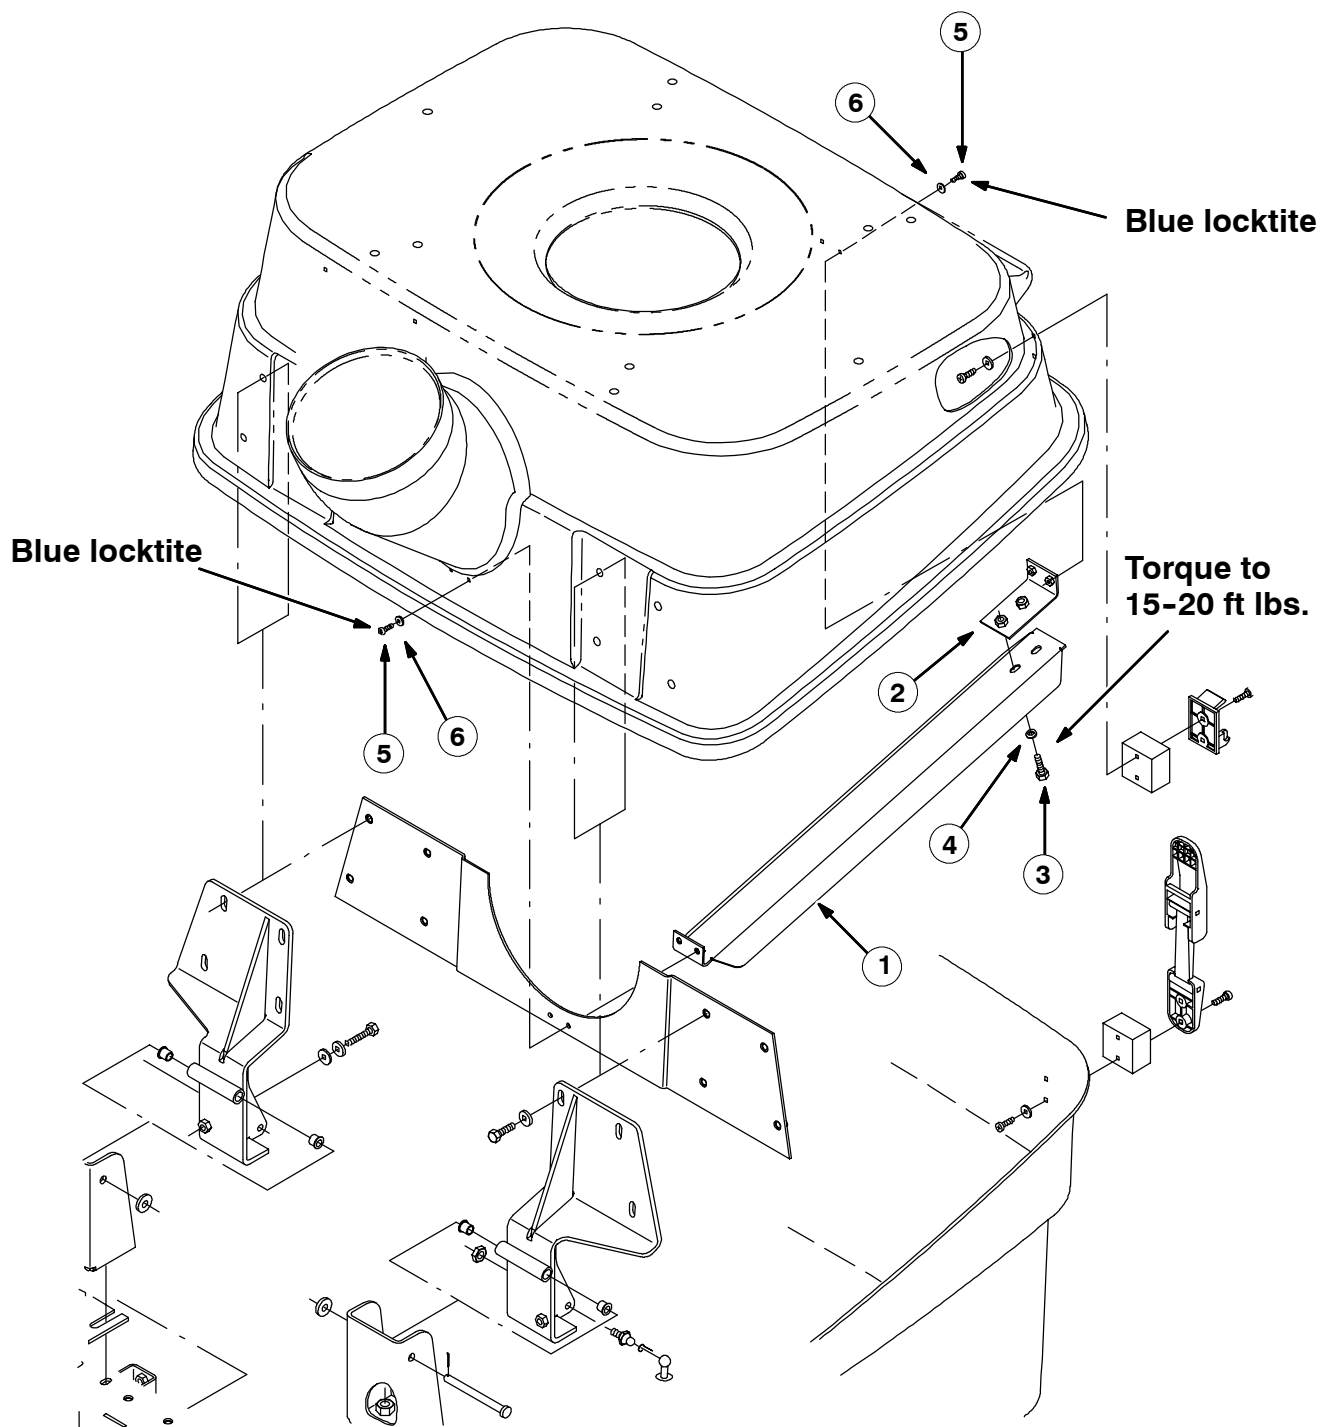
INSTALLATION, PLENUM BRACE KIT 368105
